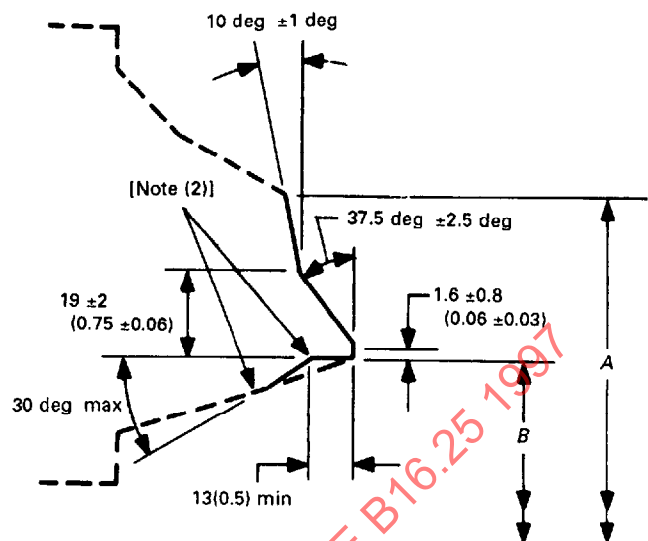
MAXIMUM ENVELOPE FOR WELDING END TRANSITIONS
